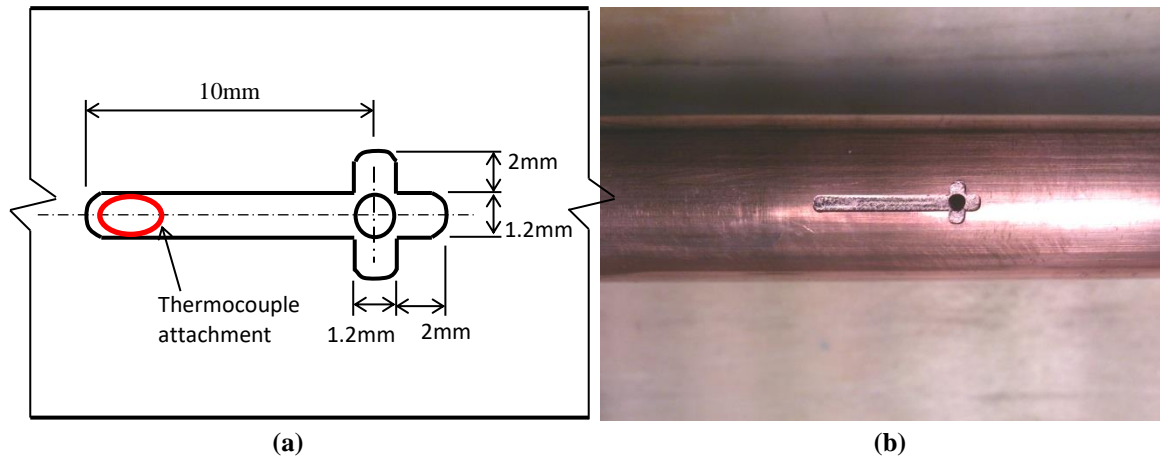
(a) Schematic details of a groove on inner tube wall (b) and picture showing the milled product.
